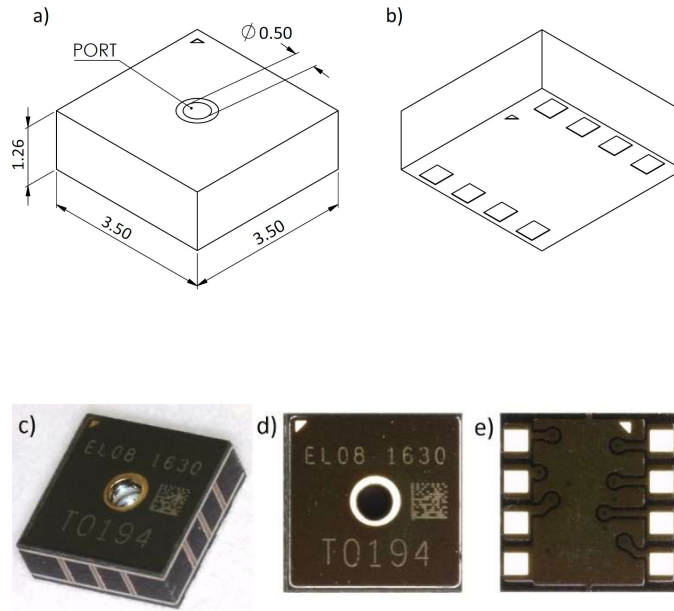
CH-101 dimension drawings (a & b) and photographs (c, d, & e)
